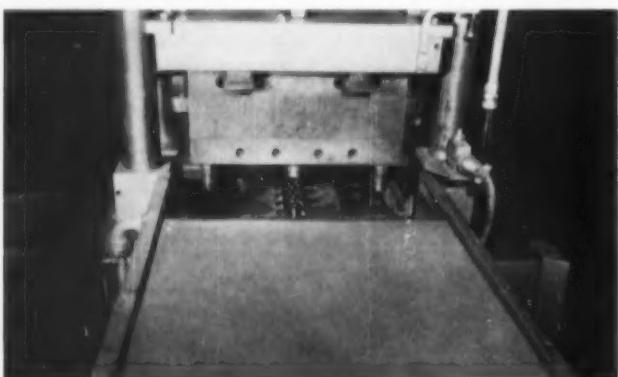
Close-up of mold as side blocks begin to close, with comb moving in to strip coil forms from ejector pins
